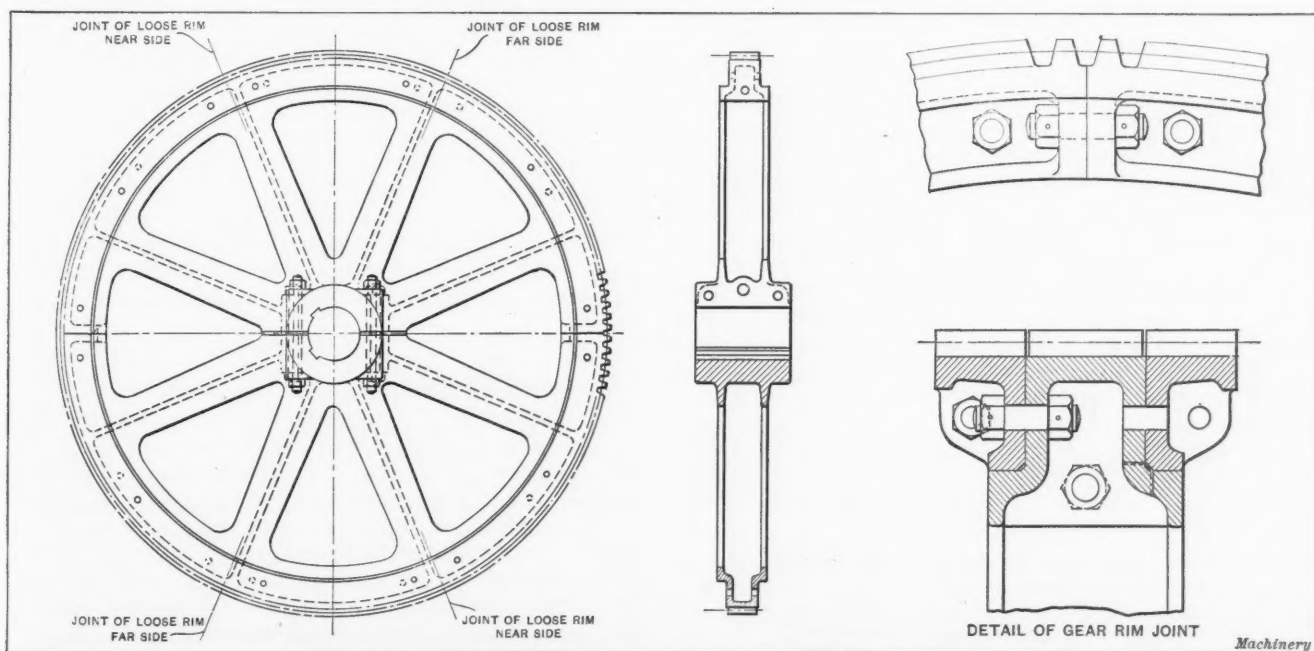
Large Triple Staggered Tooth Gear made by the Mesta Machine Co.
